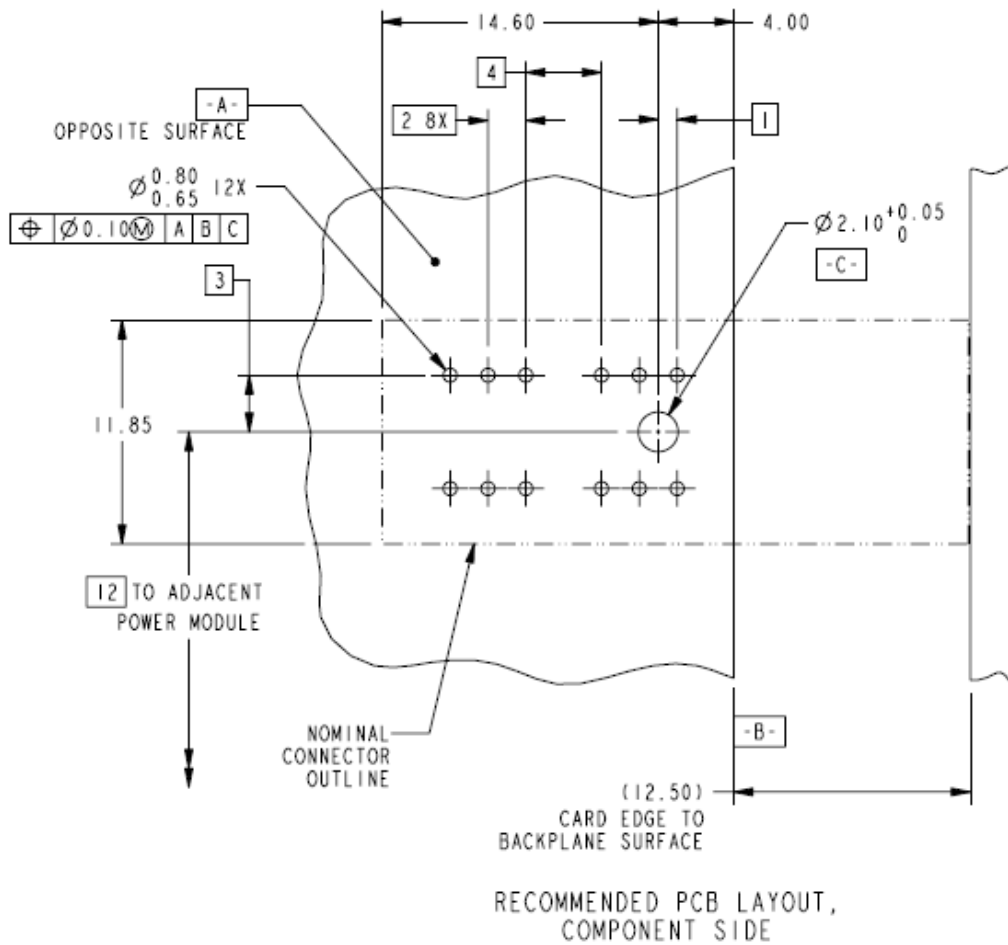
Recommended SBBMI Canister Power Header PCB Layout<sup>2,3</sup>
